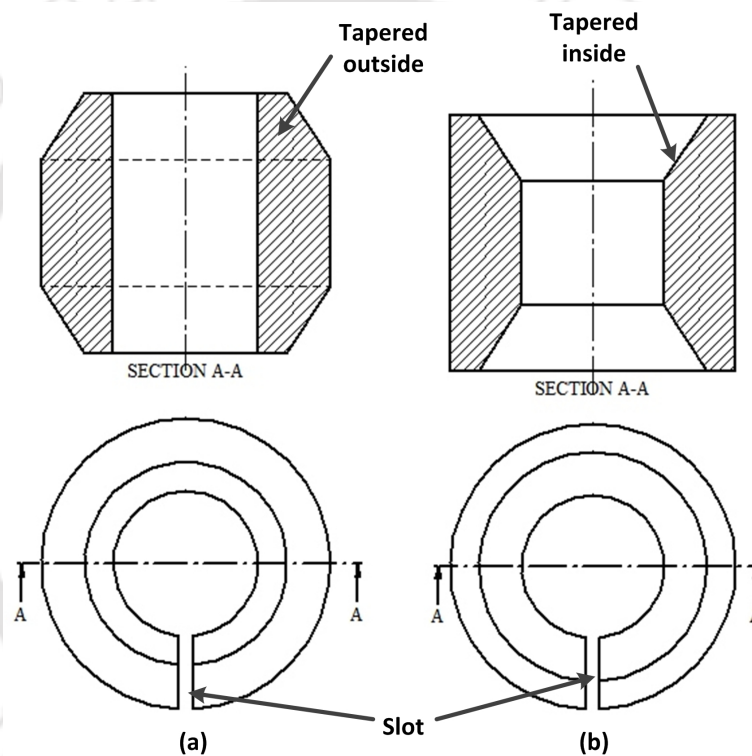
Field shaper (a) For tube expansion (b) For tube compression
